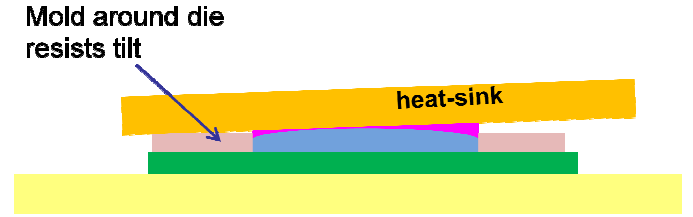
Heatsink mounted to package using spring-loaded retention hardware
